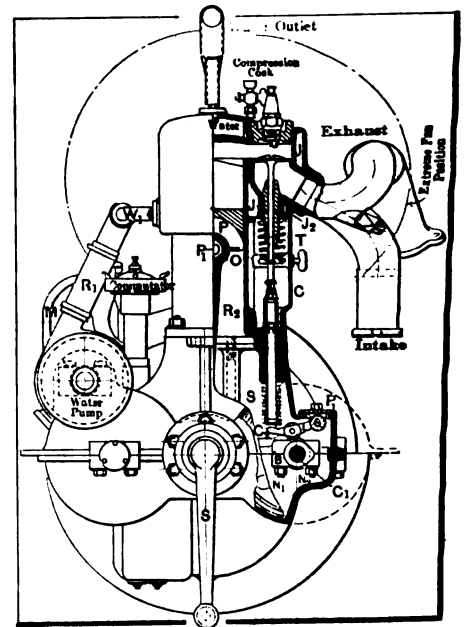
Transverse section through Rutenber motor, showing details of valve mechanism
